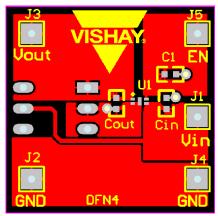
Top, PCB Layout for TDFN4 1.2 mm x 1.6 mm (board size: 1" x 1v)
